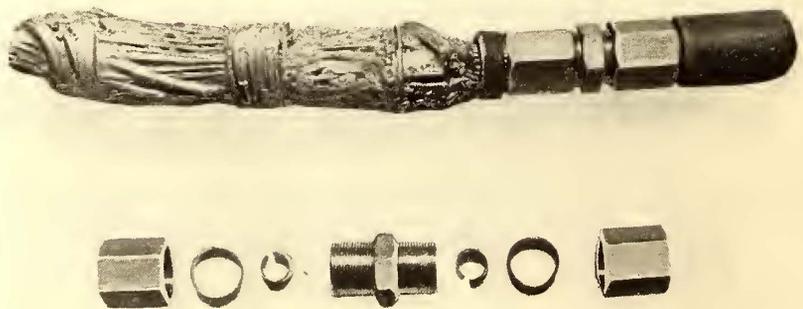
SHOWING SOLDERED JOINT AND NEW COUPLING, AND PARTS OF THE LATTER
